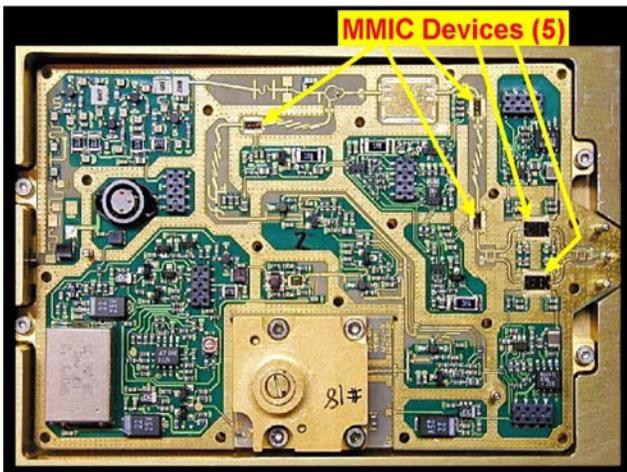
A Single Soft-Substrate Contains All RF Components. Prior to Bolting the RF Baseplate into the Module, Nothing Interferes with Automatic Assembly Tools in Manufacturing.
